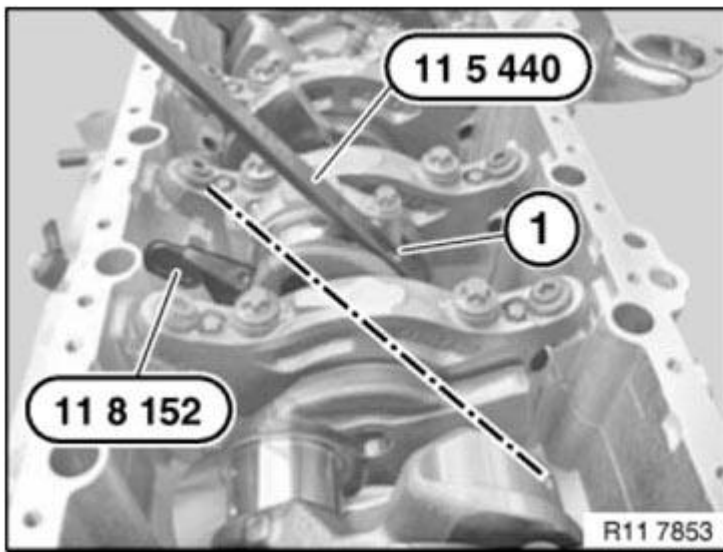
Attaching Crankshaft Journal To Connecting Rod
